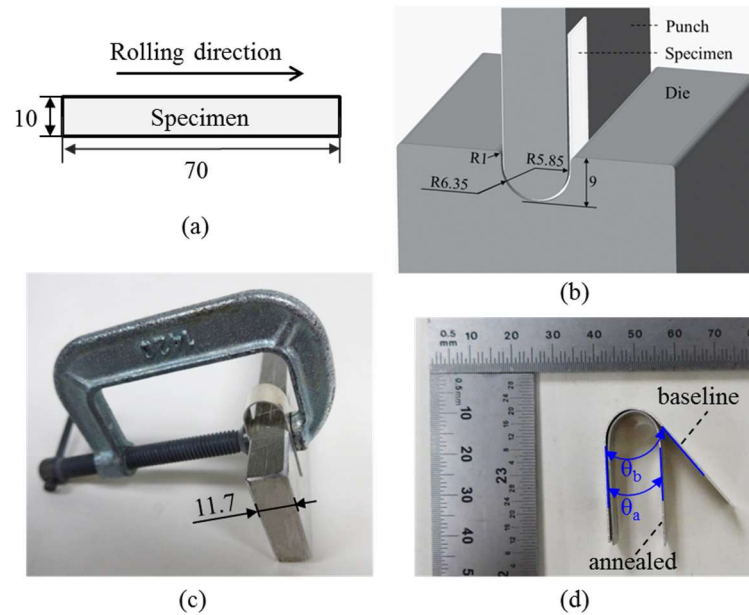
Annealing parameter selection setup (unit: *mm*): (a) specimen dimension; (b) bending test configuration; (c) clamping before the annealing process; (d) definition of strip angles
